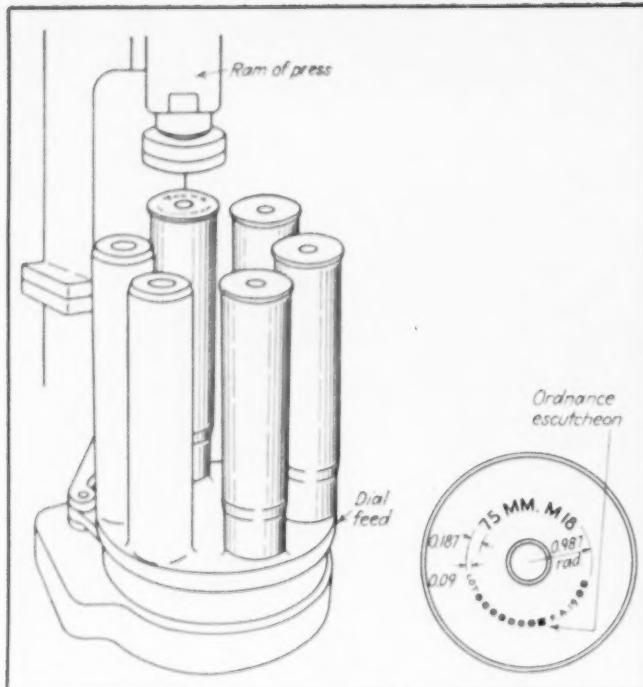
Drawing of dial-fed press for stamping cartridge cases.
